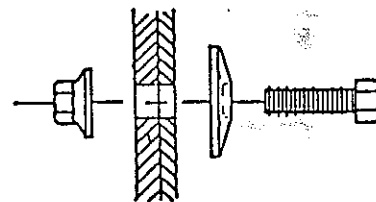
Whizlock nuts to outside of cutter deck support frame for the front two holes.
